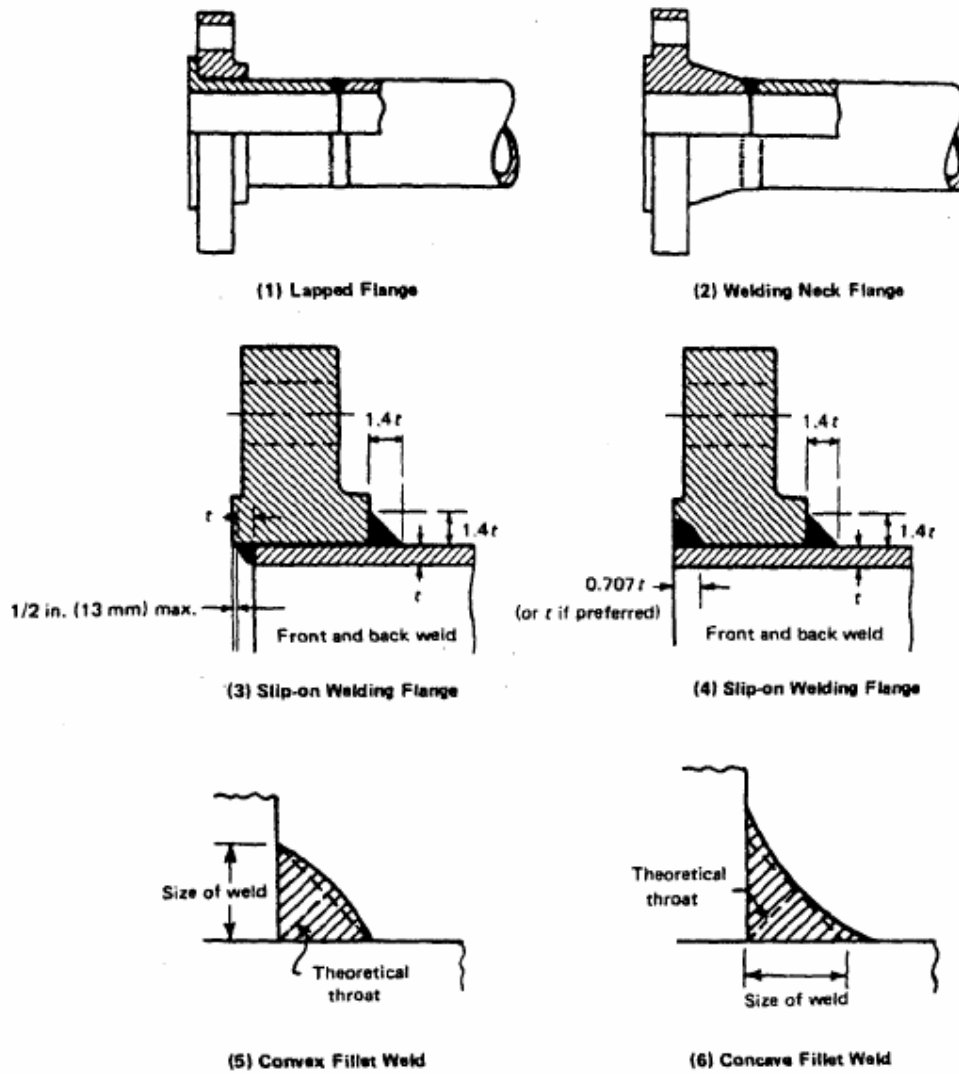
(b) RECOMMENDED ATTACHMENT DETAILS OF FLANGES
